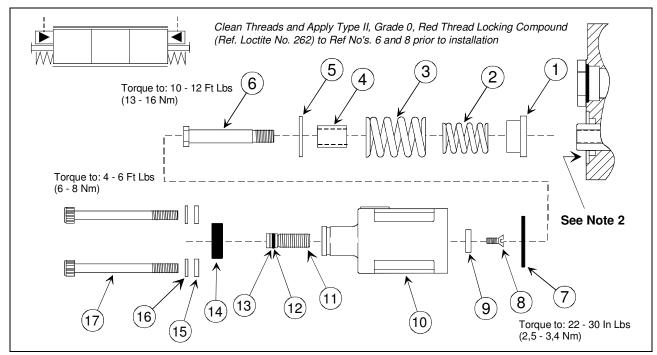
'HRO' Hydraulic Remote Spool Actuator (Positioner End)
